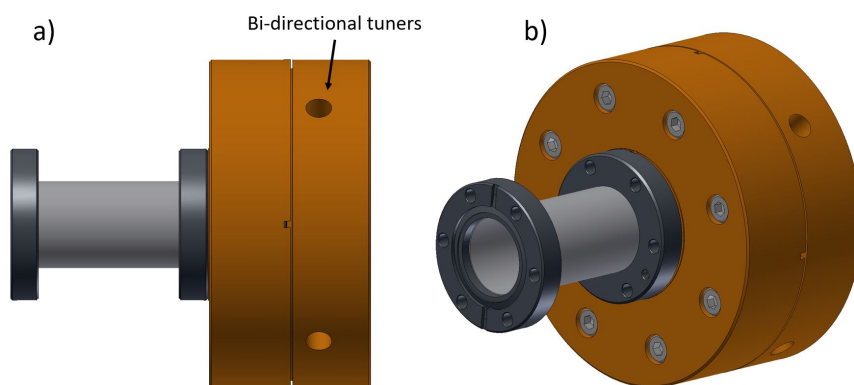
Mechanical drawing of the single cell prototype used for vacuum and tuners tests.
